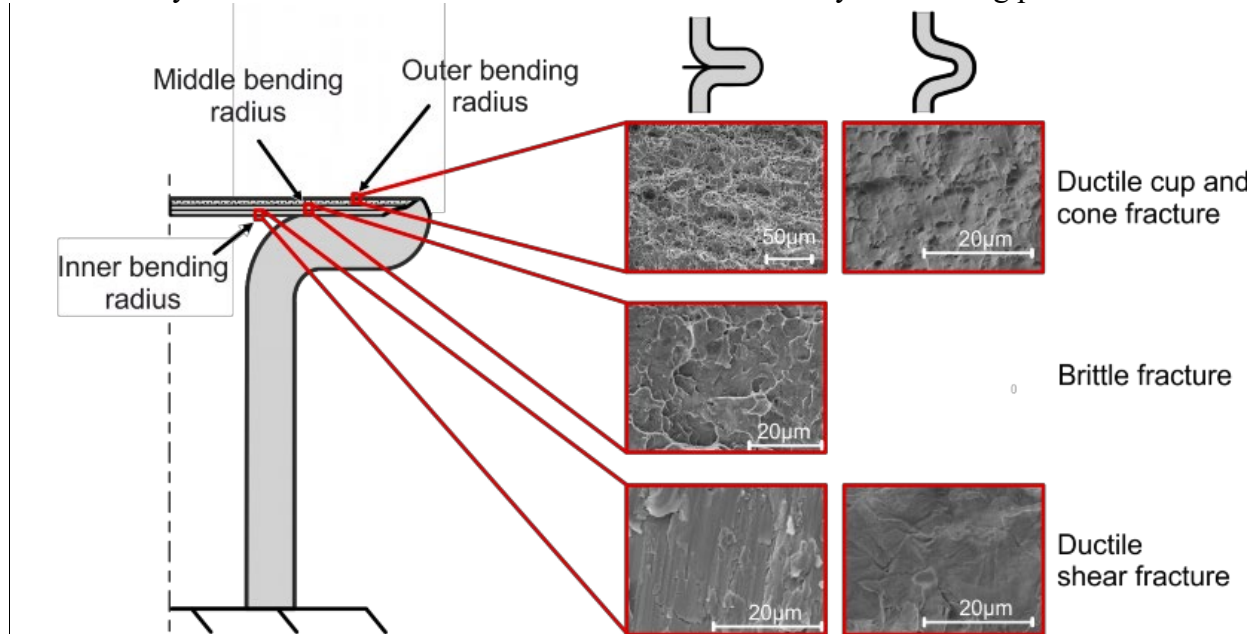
Fracture surface analysis of the opened and closed bulge after the fatigue test
